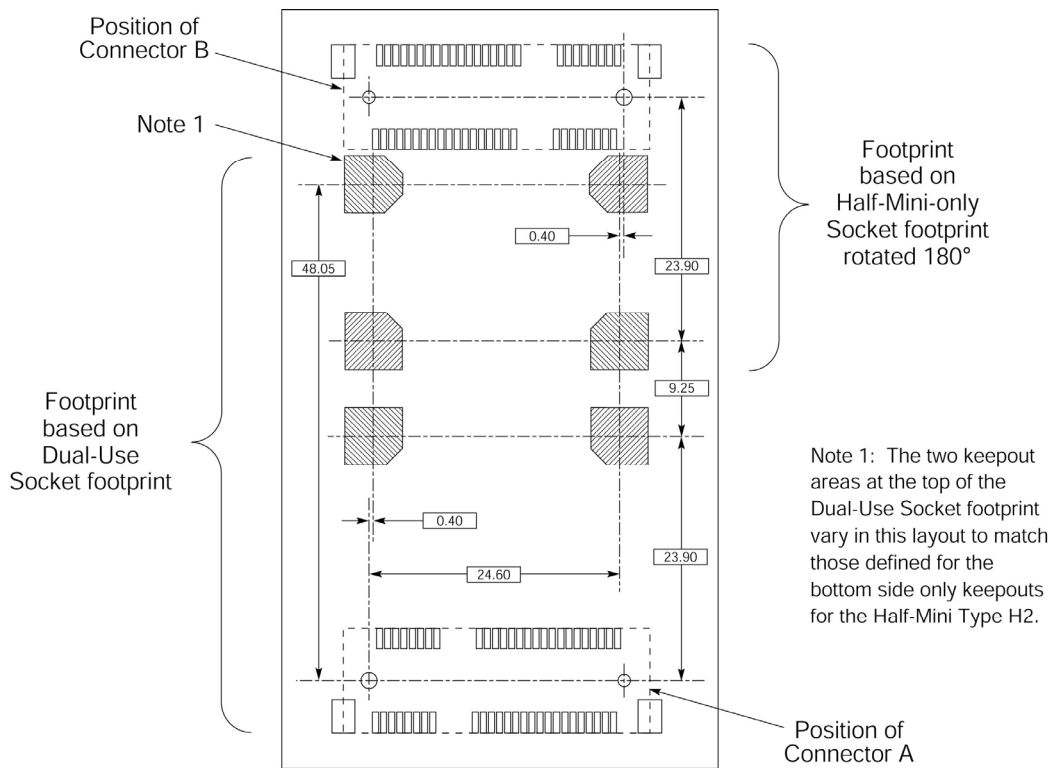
Recommended System Board Layout for Dual Head-to-Head Sockets
